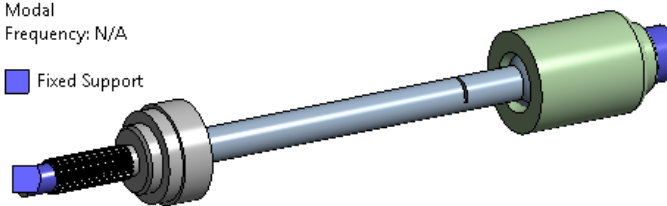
Boundary condition of Driveshaft with crack
